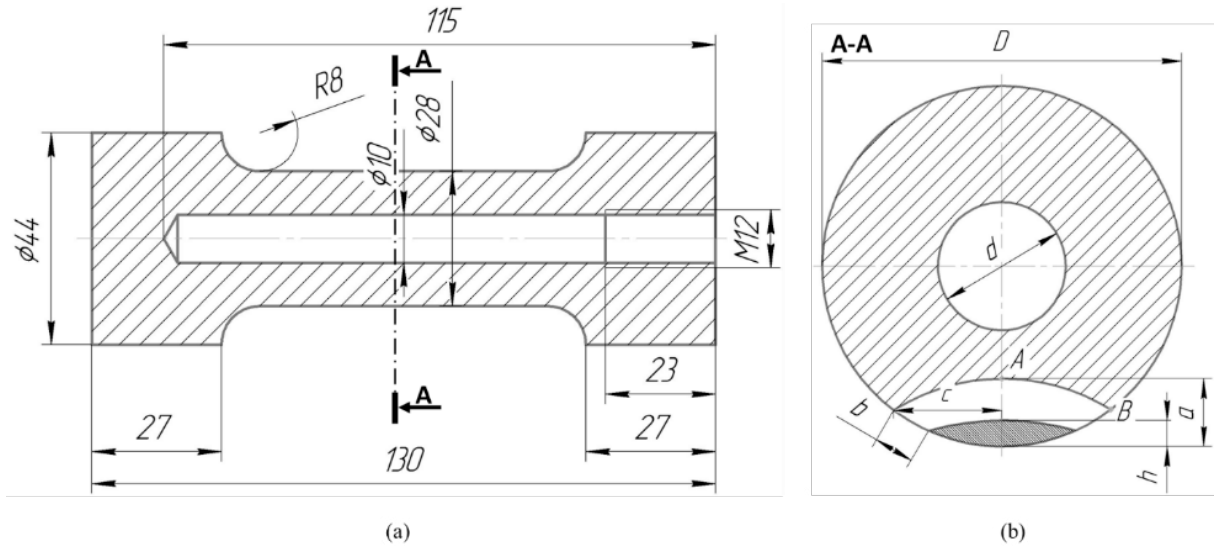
(a) Hollow-Cylindrical specimen geometry; (b) cross-sectional view of initial elliptical notch [7].
